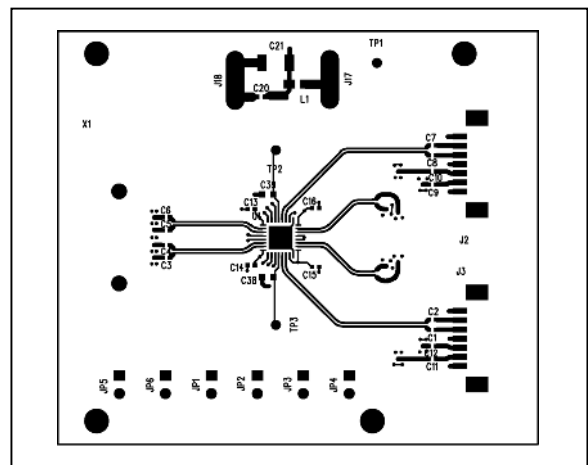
MAX3786 SATA EV Kit PC Board Layout—Component Side
